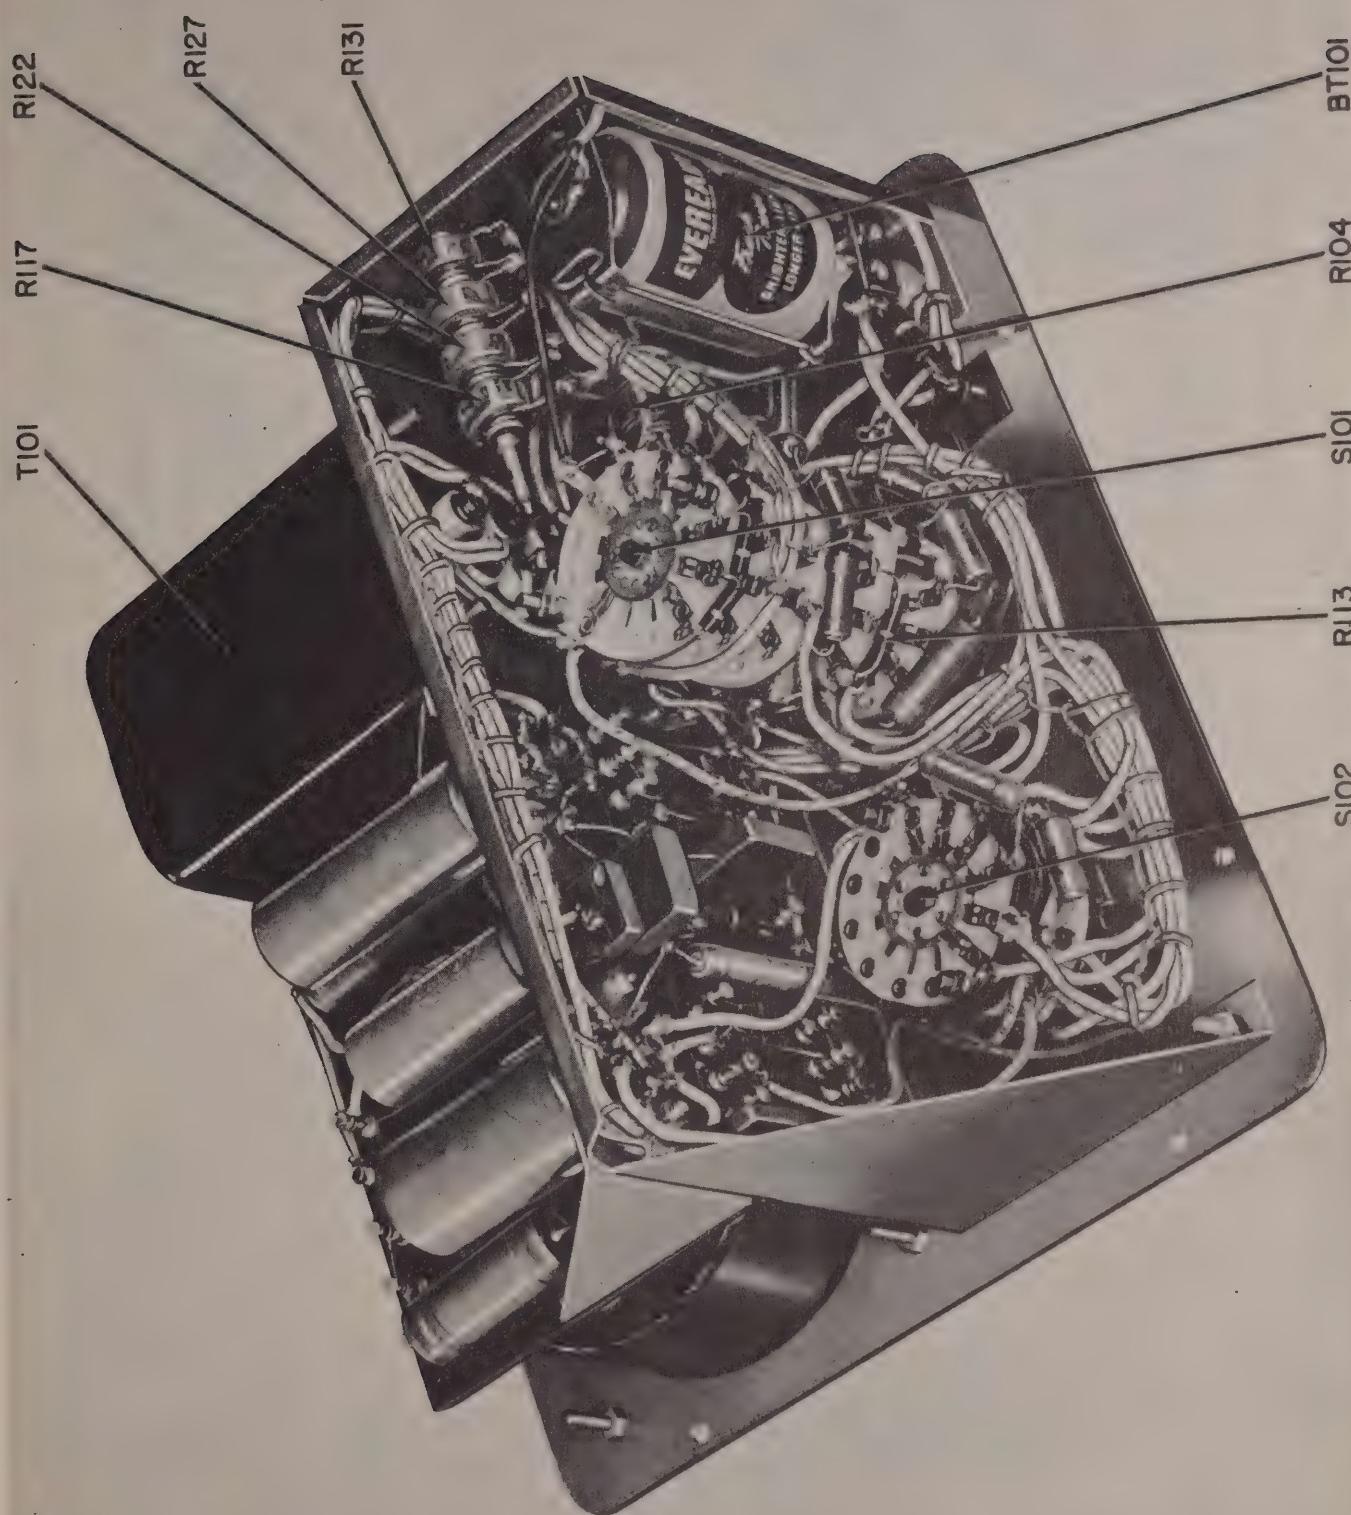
Multimeter ME-25A/U, Case Removed, Rear Oblique View
